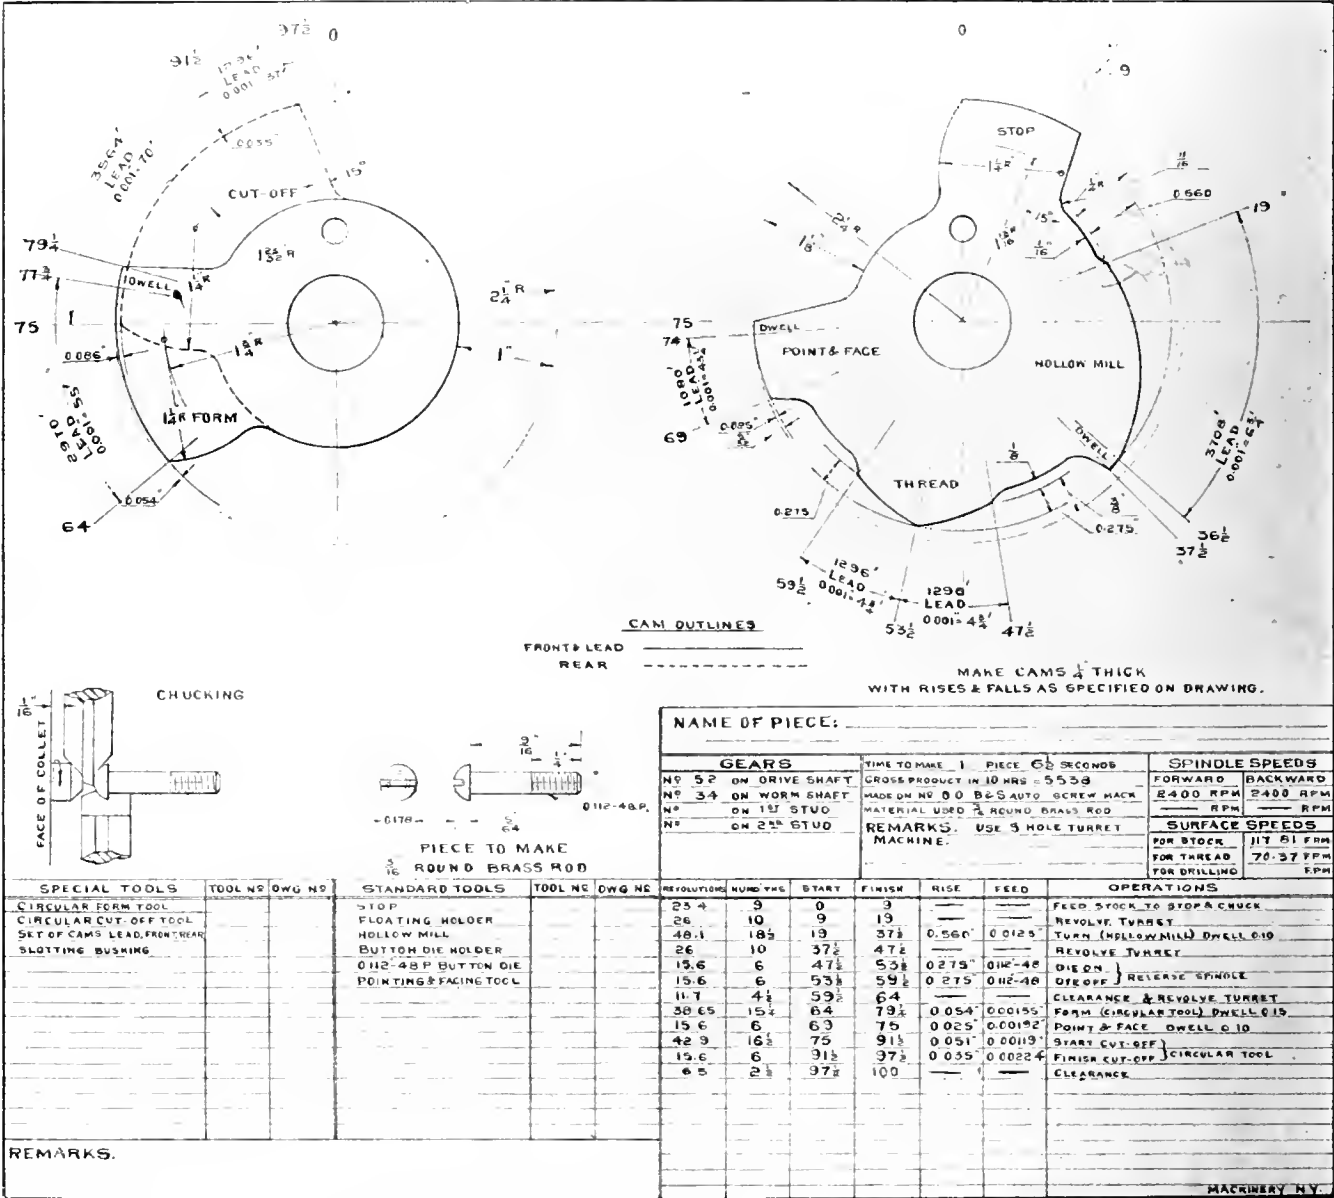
Standard Cam Drawing adopted by the Northern Electric & Mfg. Co., Montreal
